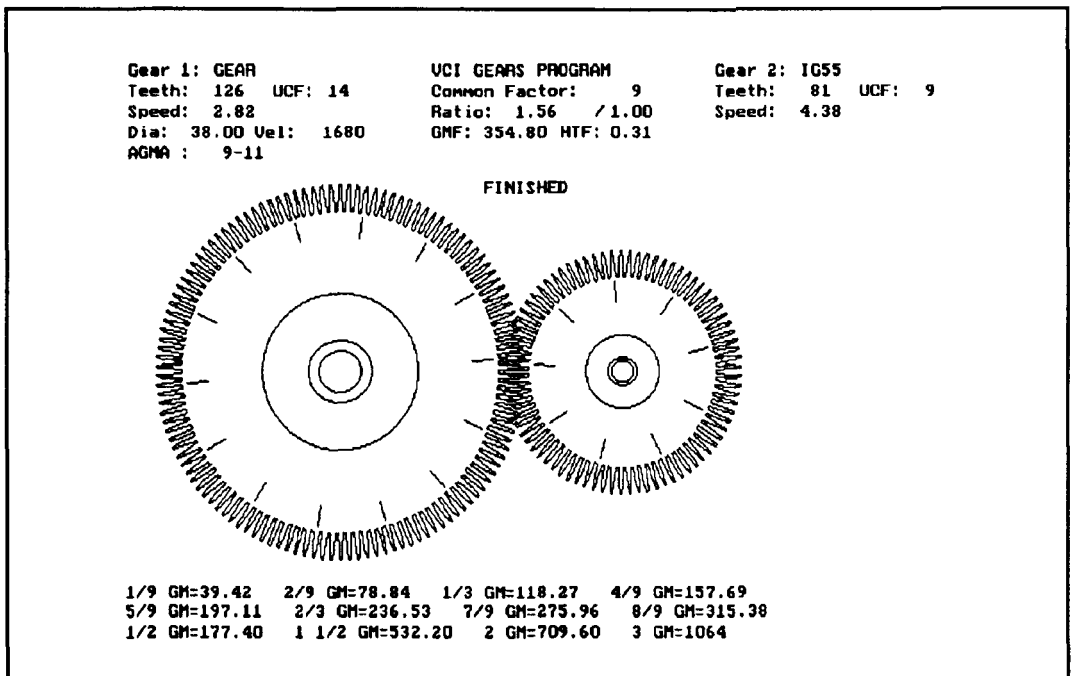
Gears Program Output of a Dryer and Idler Gear in Mesh.
